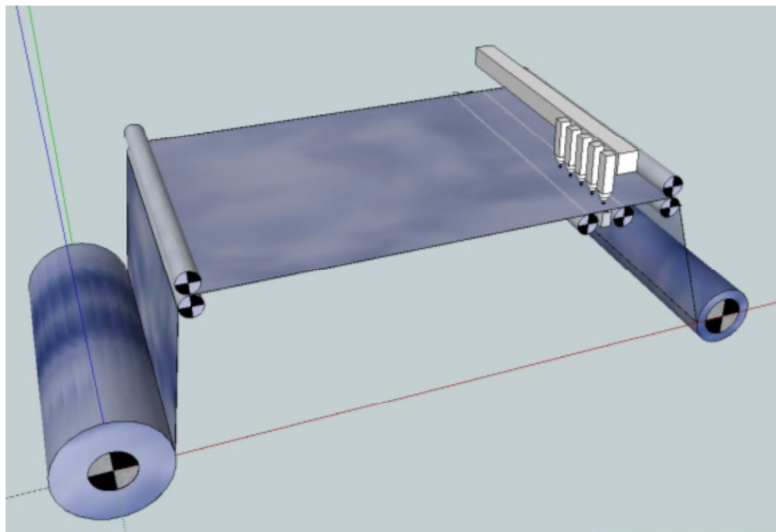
Concept for reel-to-reel system with 5 laser machining heads.
